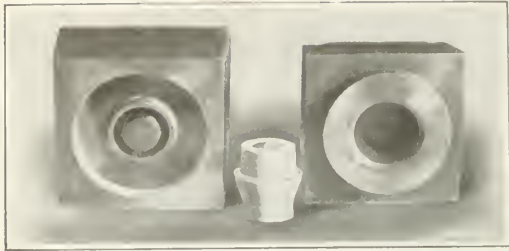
Upper and Lower Dies used in Press shown in Fig. 130
